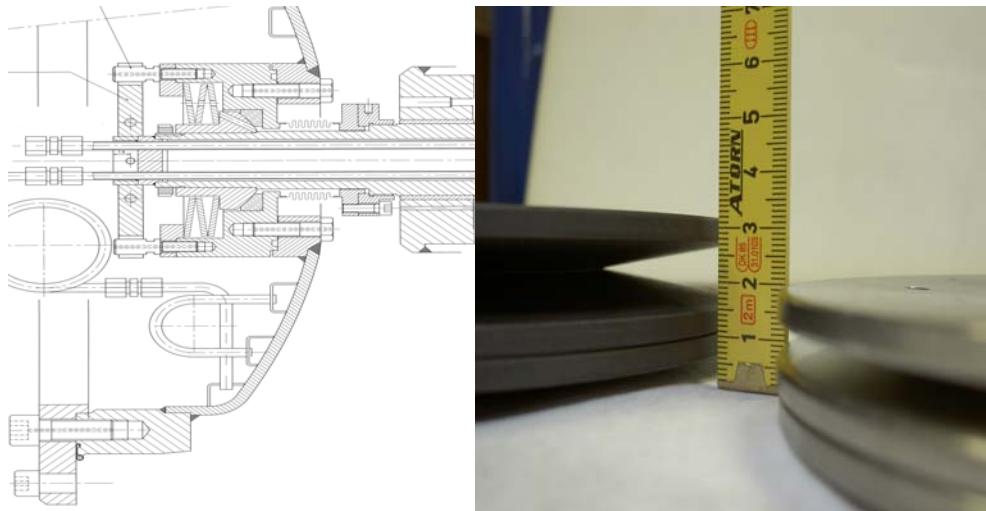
Left: Drawing of the inlet valve with the construction details concerning the Belleville washers, cooling water tubes and valve plate bellows. Right: Photo showing the spring arrangements with the old Belleville washer set (right side) and the new one (left side).
